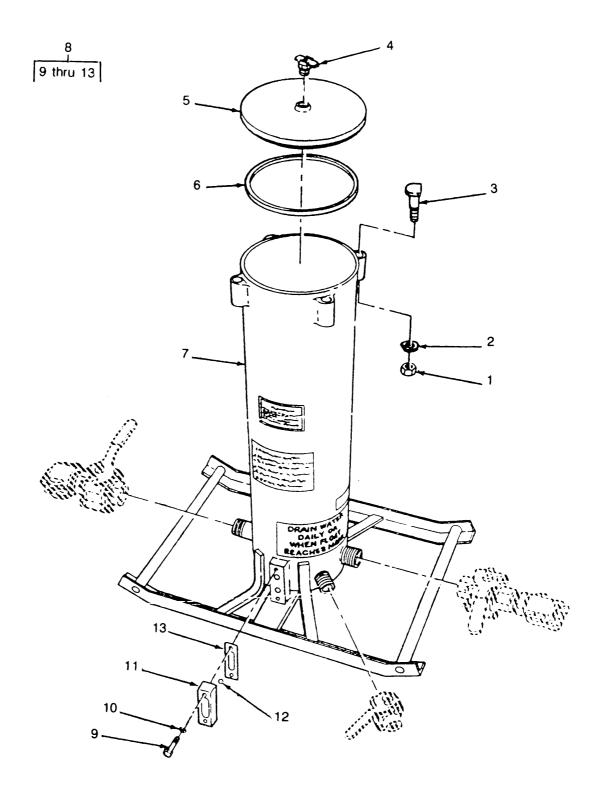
Vessel and Skid Assembly (Sheet 1 of 2)
